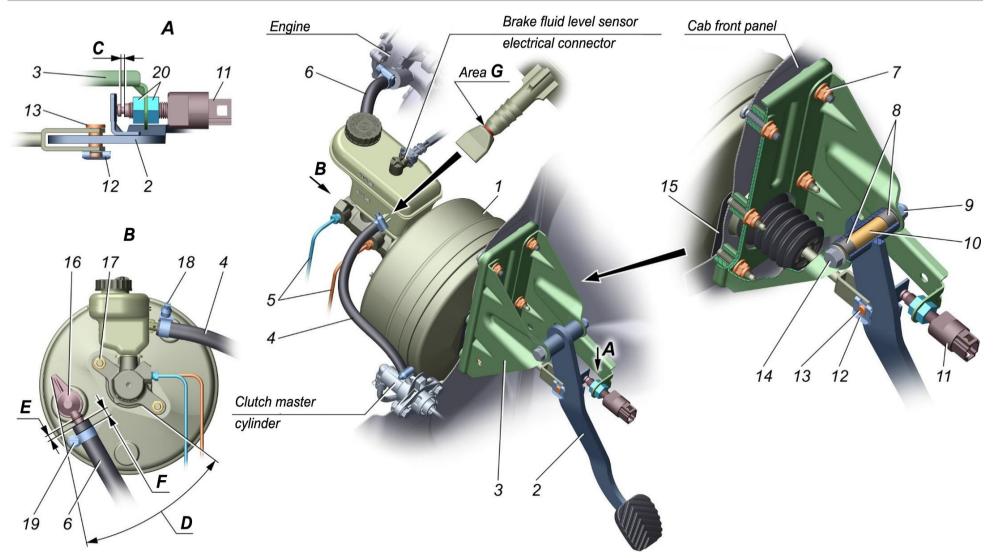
Installing the brake module and brake pedal: 1 - brake module; 2 - brake pedal; 3 - brake pedal bracket; 4 - hose; 5 - pipelines; 6 - vacuum supply hose; 7,9,17 - nuts; 8 - pedal shaft bushings; 10 - distance bushing; 11 - brake light switch; 12 - push rod pin stopper; 13 - push rod pin; 14 - bolt; 15 - gasket; 16 - brake booster check valve; $18, 19^{-1} - clamps$; 20 - adjusting nuts
